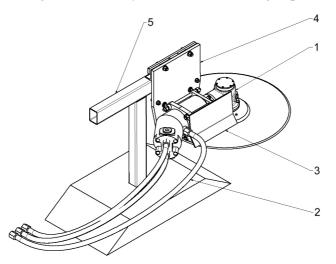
Laboratory set of mechanical pruner design: 1 – rear transmission with axial piston hydromotor; 2 – hydraulic lines; 3 – little plough blade; 4 – clamping plate; 5 – frame for laboratory measurement
